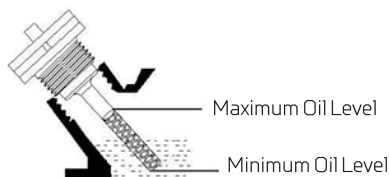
Oil Fill Opening, Dipstick and Oil Level
